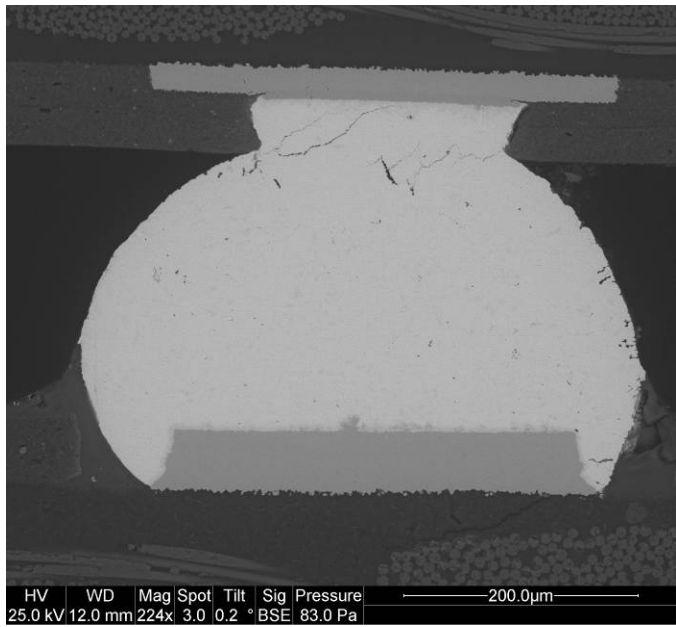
Cross section of corner SAC305 solder ball, component U6, ball P14
